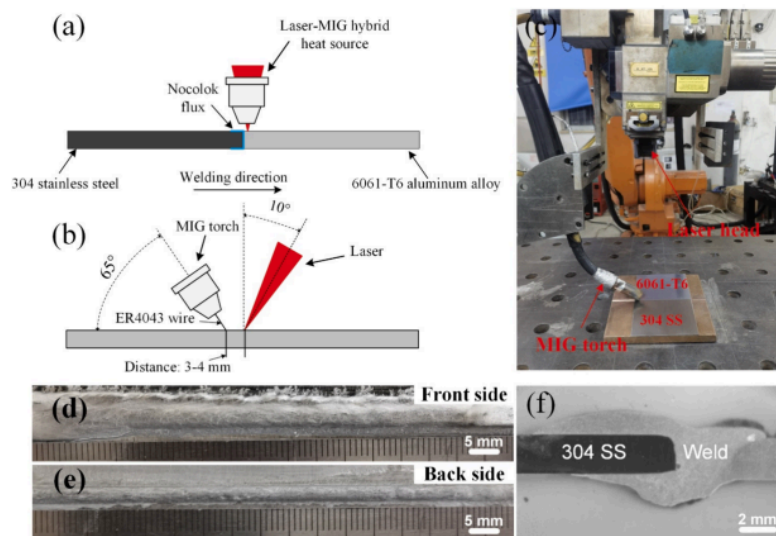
(a–c) Schematic diagrams of the welding operation and (d–e) visual appearances of welds in Al/steel laser-MIG welded-brazed joints [45]
